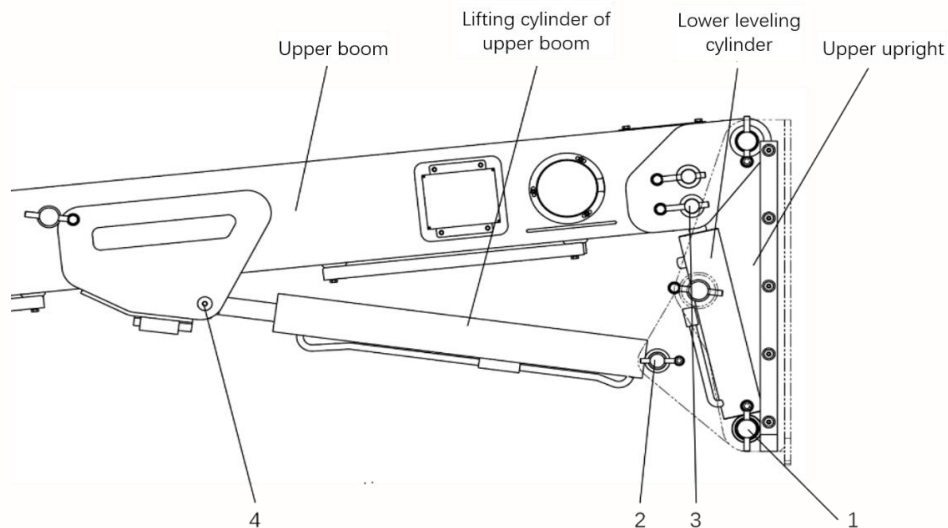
Lower lifting cylinder and upper boom lifting cylinder disassembly diagram
